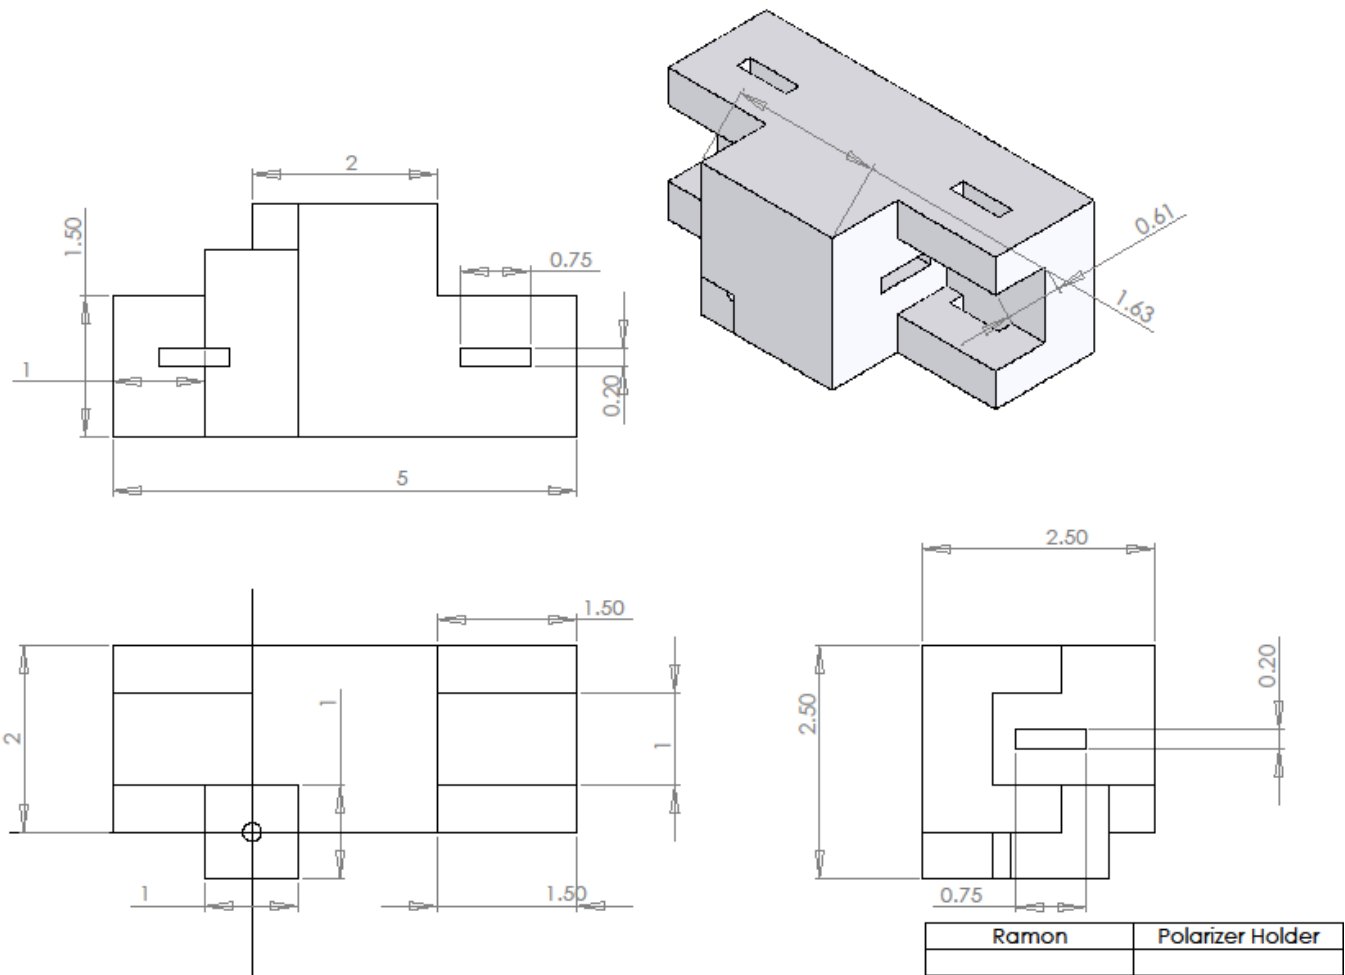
CAD drawing of the Polarizer Holder of the 2-DOF sensor.
